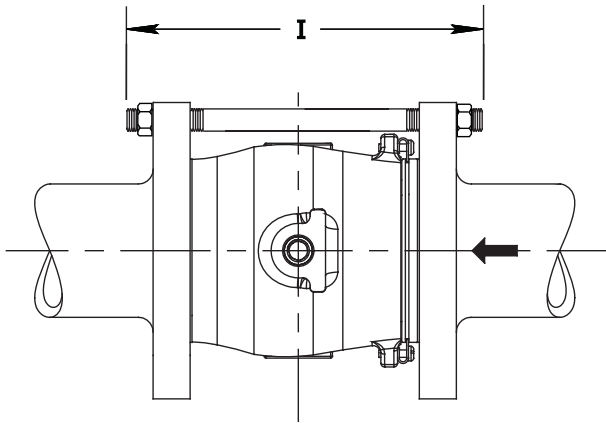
Typical Valve Assembly Diagram and Dimensions
